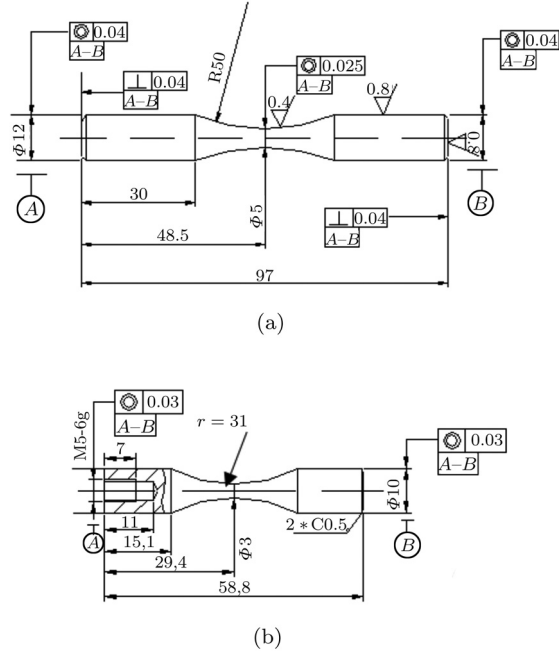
Dimensions of the specimens used in (a) conventional fatigue test and (b) ultrasonic fatigue test.
